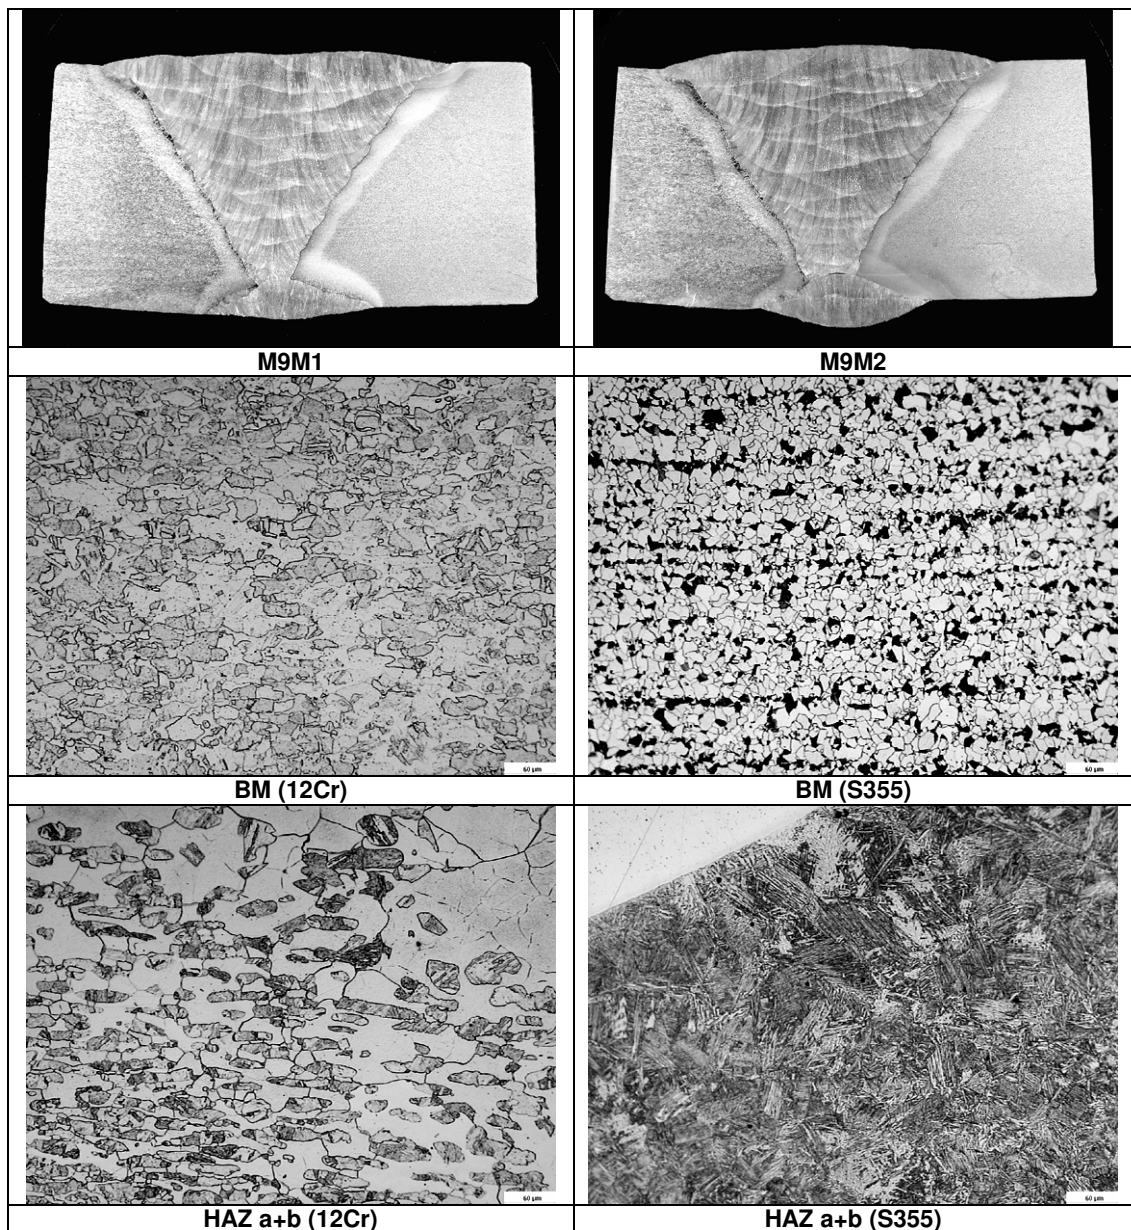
Macro and microphotographs of 20 mm thick SMAW weld with 309 filler metal (M9).
